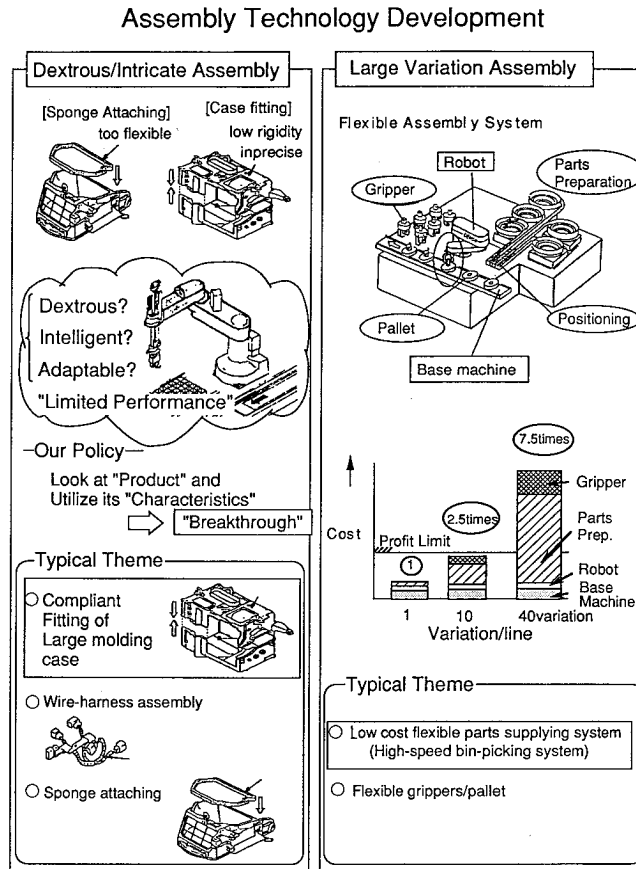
"Assembly Technology Development" Courtesy Nippondenso. Used by permission. This figure shows that NDCL has partitioned development of assembly automation into two classes: dextrous/intricate assembly and large variation assembly. The former involves difficult physics which may be easy to identify, while the latter mainly involves part logistics and changing conditions that may not be obvious without further analysis. NDCL notes in this figure that one can attack the dextrous/intricate problems by requiring robots that have the intelligence and dexterity of people, or by assuming that robots cannot do such tasks, or finally by redesigning the product slightly but meaningfully so that it will be easier to assemble by robot. The last approach has been taken, resulting in products that, despite their difficulties, can be handled effectively by relatively ordinary robots. NDCL attacks the large variation problems by direct economic analyses, focusing attention on the cost-drivers. These may or may not pose technological challenges, in contrast to the dextrous/intricate cases. The solutions may require only better organization or communication; or they may require new part feeding methods or cleverly designed robot grippers.
